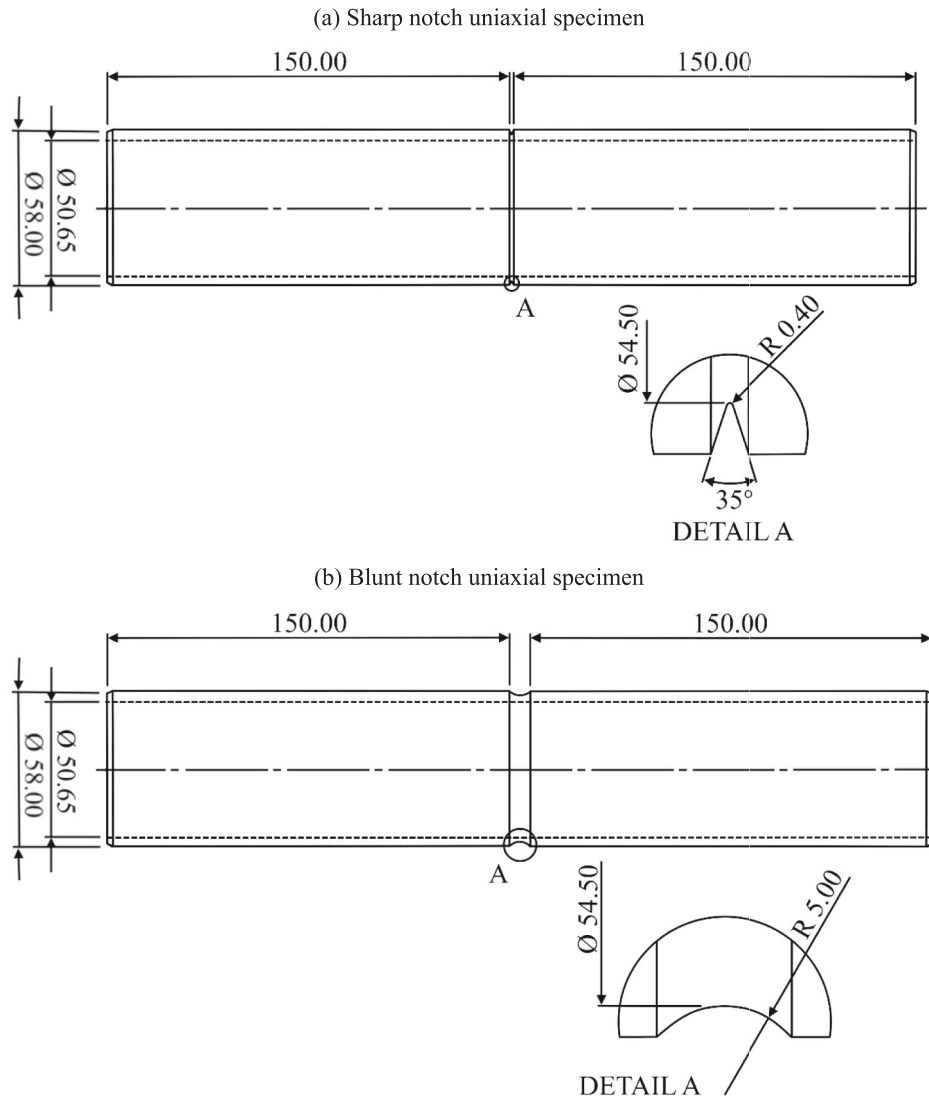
Uniaxial fatigue specimen dimensions, highlighting the two different circumferential notches tested.
